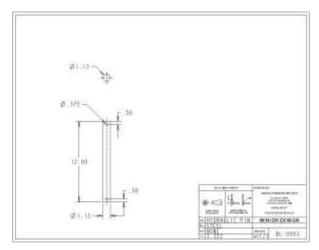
Drawing of hydraulic pin that holds hydraulic in place to the mount
